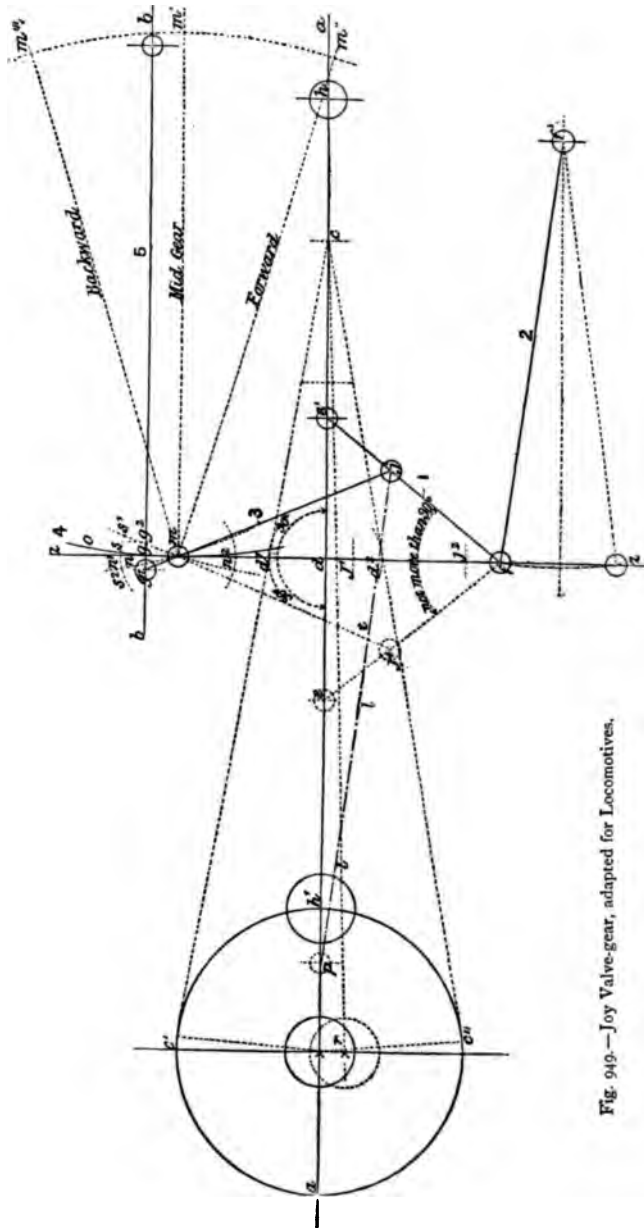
Joy Valve-gear, adapted for Locomotives.
